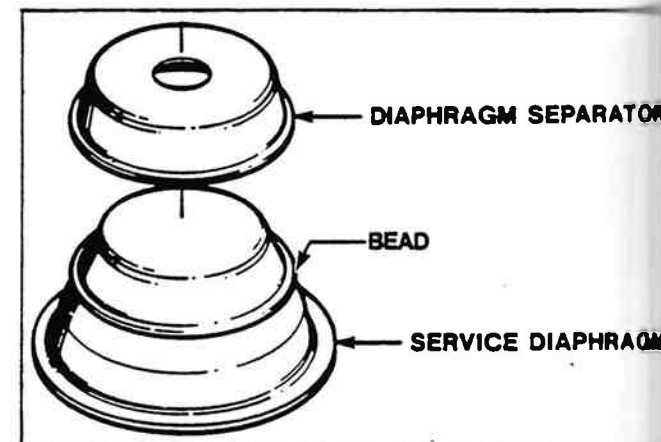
Diaphragm Configuration in Drive Axle Brake Chambers.
